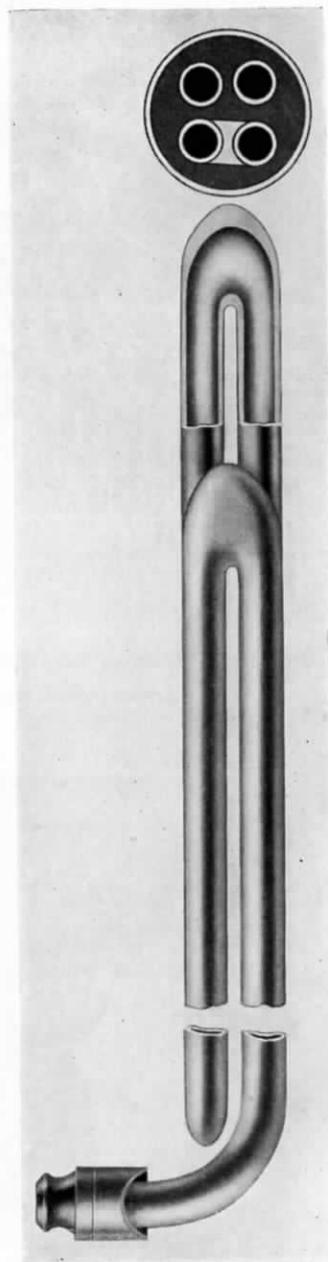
ELEMENT WITH "MeLeSco" SOLID MACHINE-FORGED RETURN BEND.
